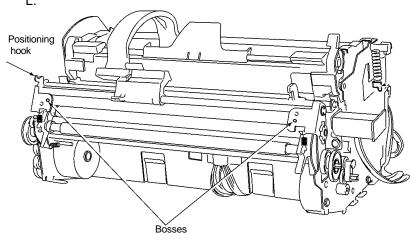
Installing the Y-CA Chassis Assy (1)
